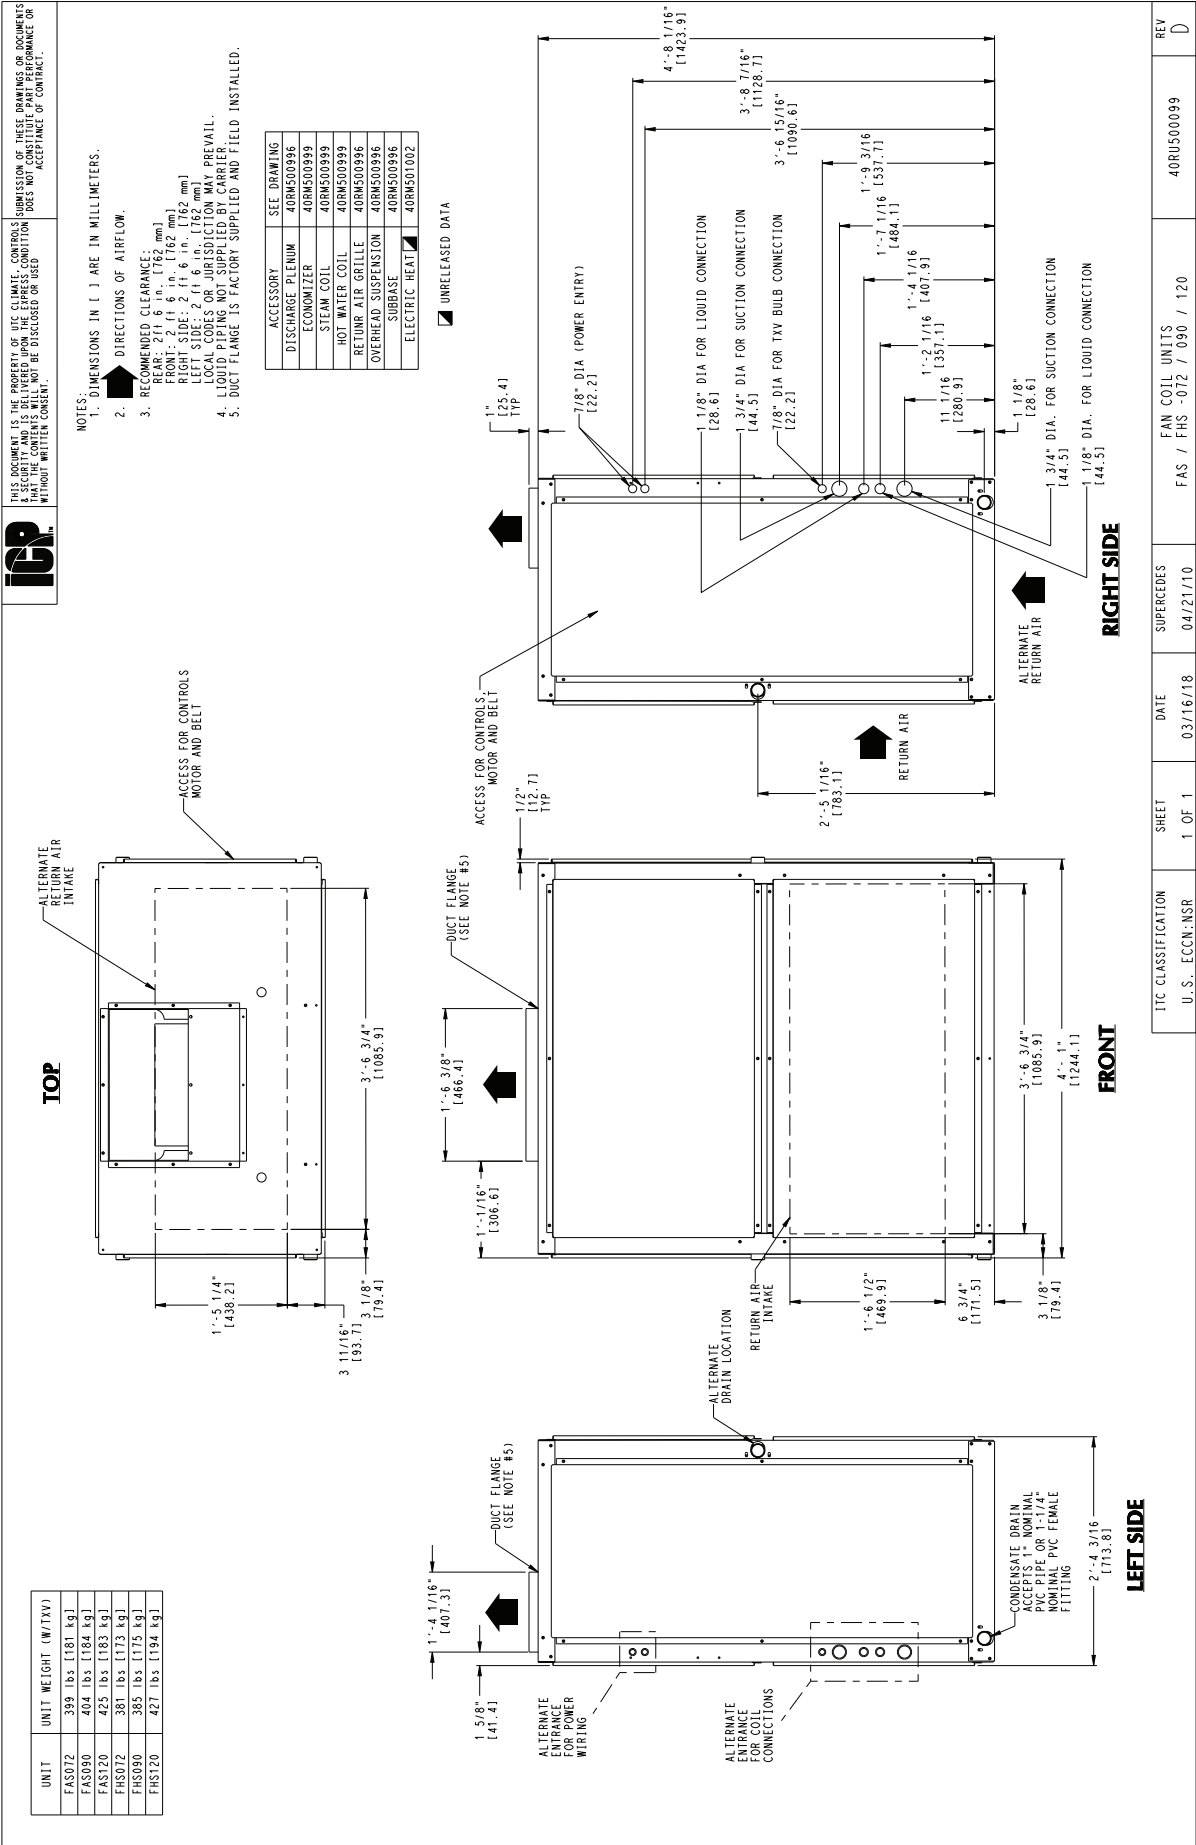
Unit Dimensions (6-10 Ton Units)
